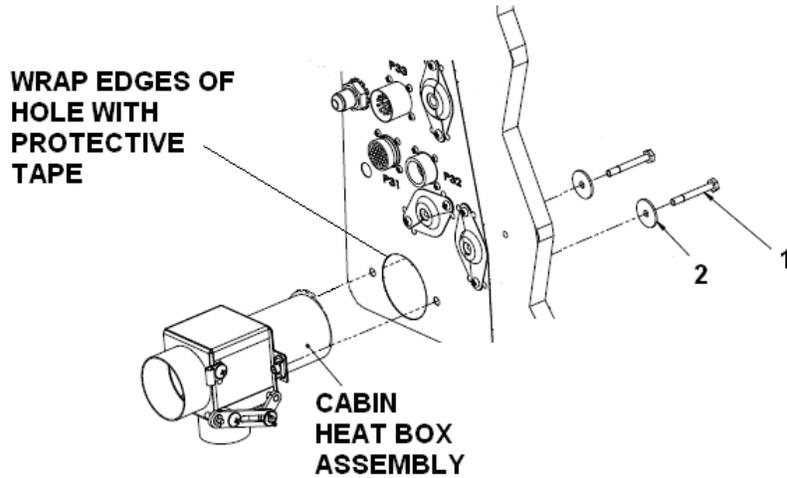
Cabin Heat Box Assembly Removal and Installation
